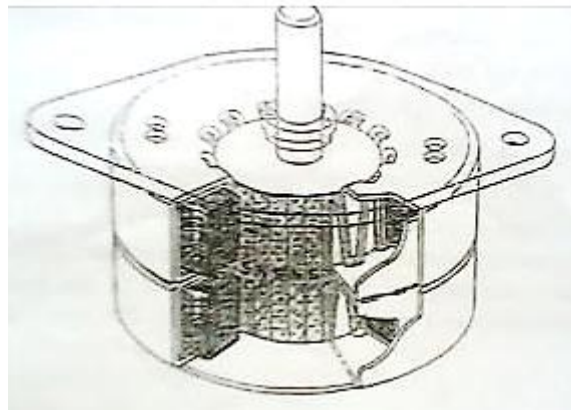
Cutaway diagram of a claw-tooth PM motor
